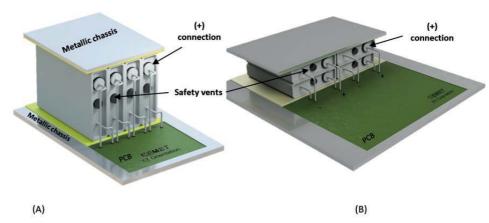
(A) Upright position with double-sided heat sinks in row arrangement. (B) Horizontal installation position with double-sided heat sink and stackable assembly. The bends in the lines are illustrative.
